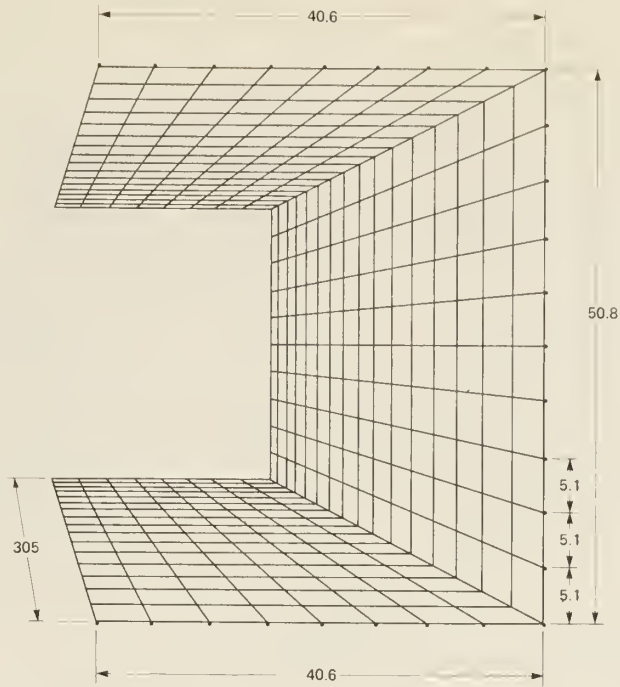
End view of the single piece of wire mesh which is folded to create the body (top, back and bottom) of a row of 10 cages.
